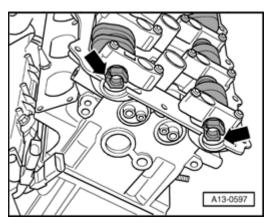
Rotating Inner Part And Outer Part Of Both Camshaft Adjusters Against Each Other Up To Lock Position
